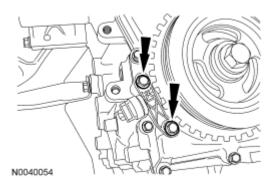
Locating CKP Sensor Bolts Courtesy of FORD MOTOR CO.
